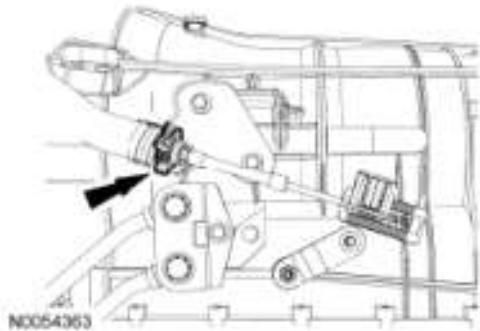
Locating Transmission Insulator And Retainer Bolts
